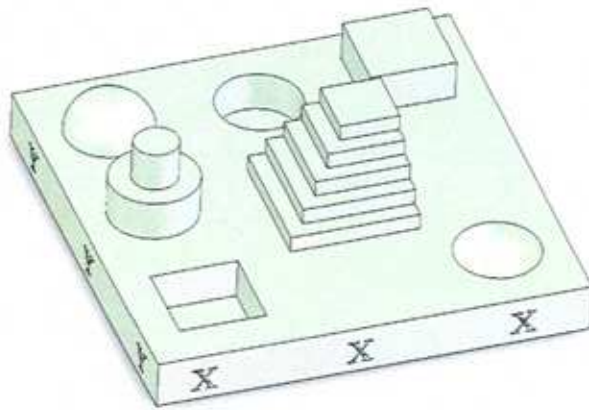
CAD Geometry test piece and sample produced
